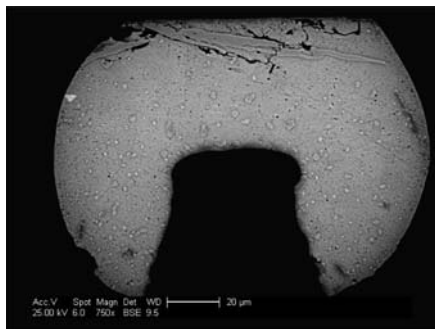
Flip-chip solder joint after thermal cycling. Early failure along (and through) a large Ag_3Sn platelet.
